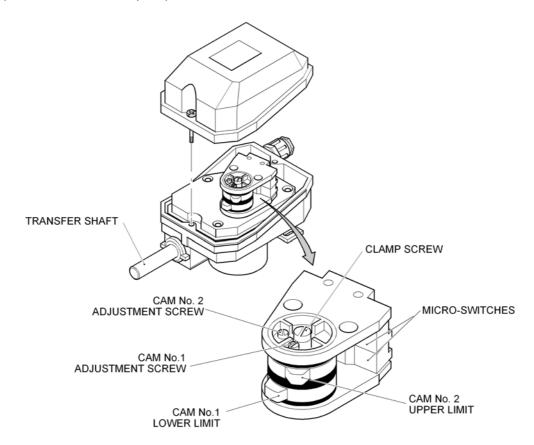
Setting the Upper/Lower Limit Switch - Rotary Type
